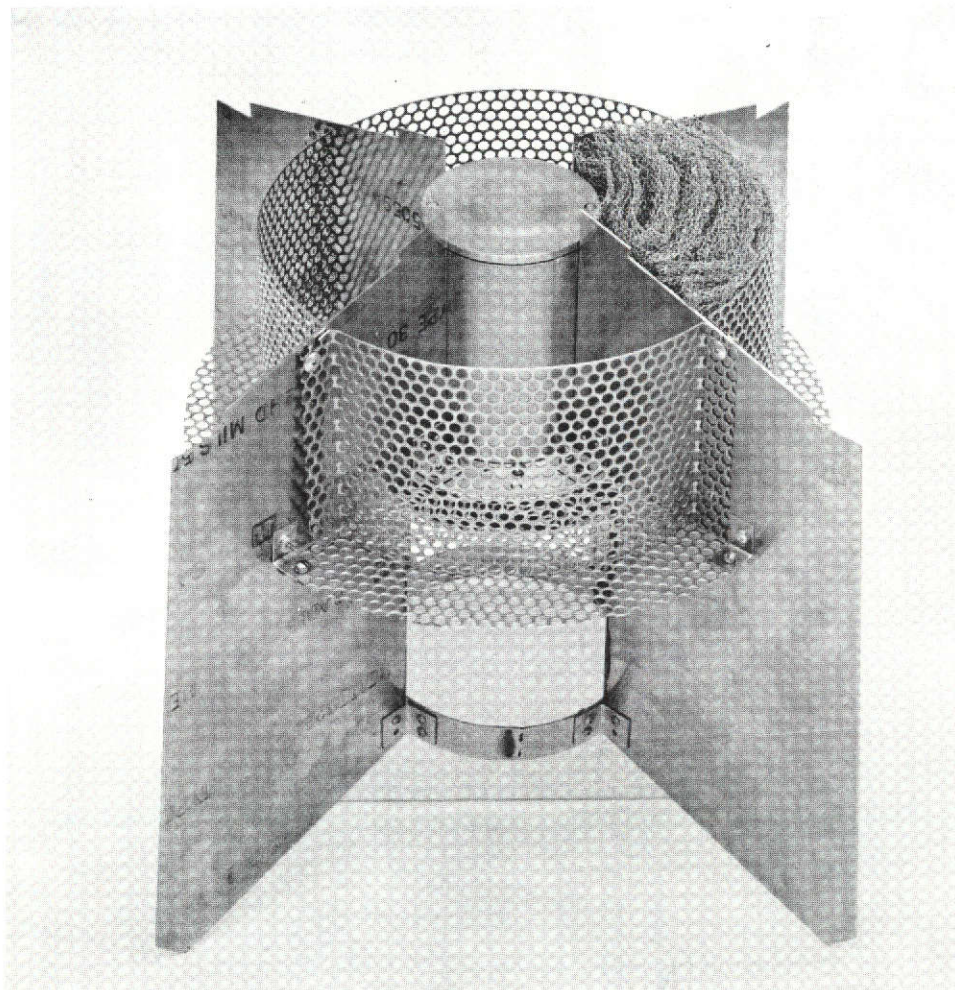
IMPELLER/DEMISTER ASSEMBLY
